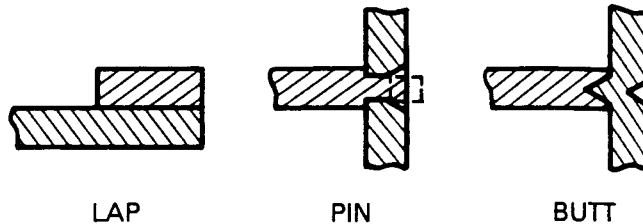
Typical Joint Designs Used for Automatic Forge Welding
